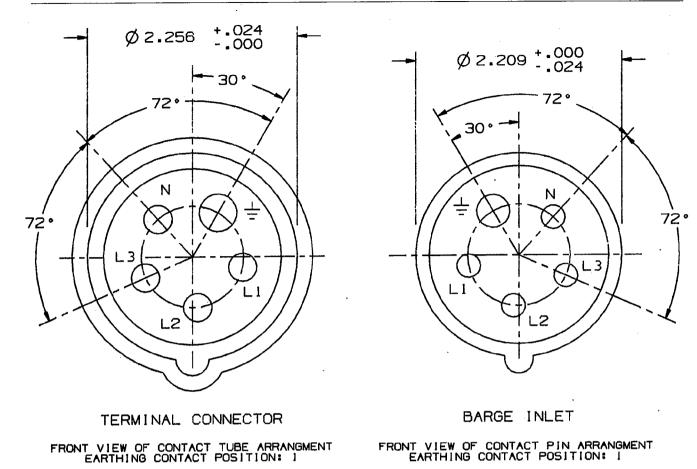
Construction Details for Barge Inlet and Terminal Connector (dimensions in inches)
